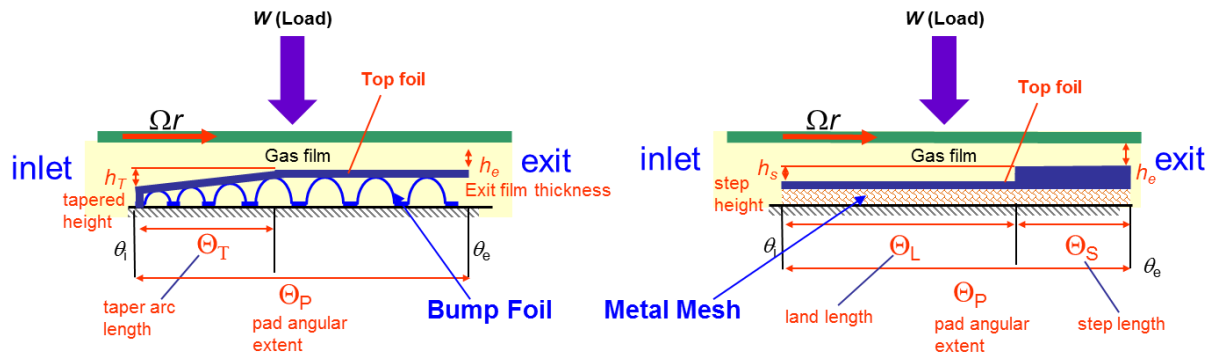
Schematic views of (a) a tapered bump-type and (b) a Rayleigh step metal mesh thrust foil bearing.
